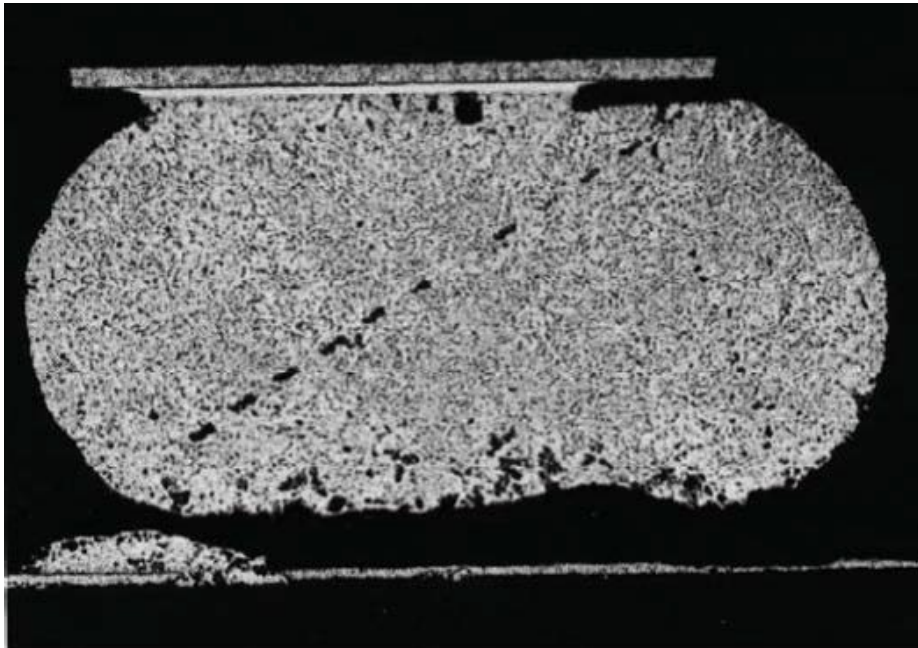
Microsection through a ball showing non-wetting of solder to pad: Reject
